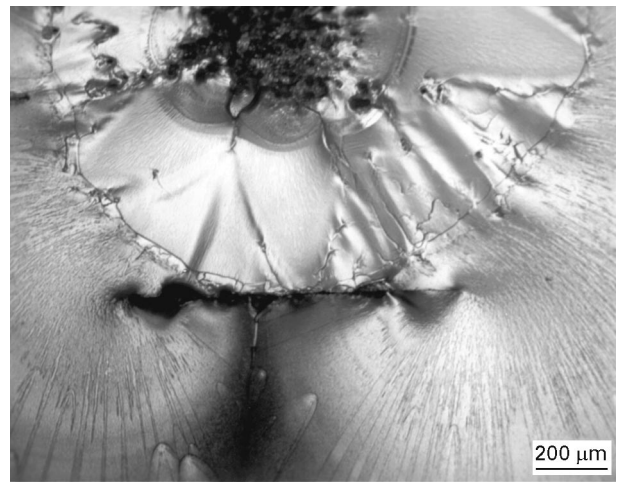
Typical fracture surface of specimen with T cracks showing crack arrest by the delamination crack in the centre of the picture.
